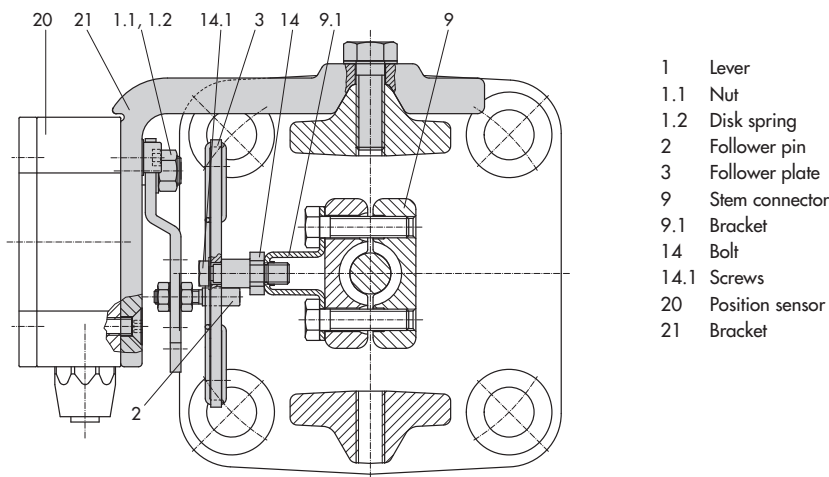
· Mounting according to IEC 60534-6 (NAMUR)
